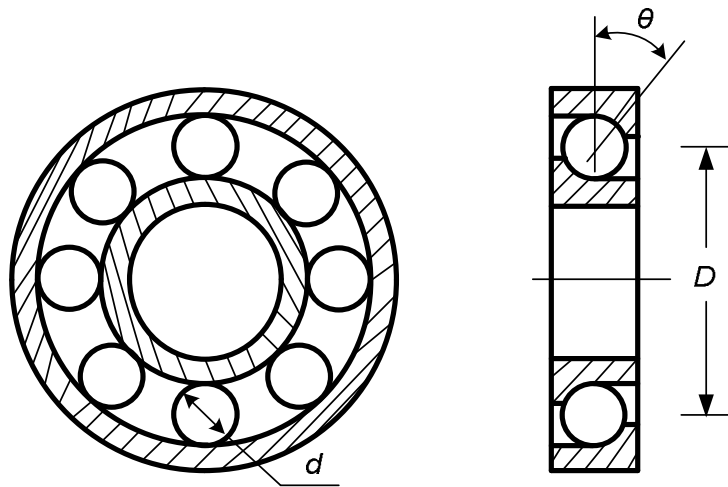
The geometry of a rolling element bearing. d = diameter of the rolling element; θ = angle of contact; D = pitch diameter.
